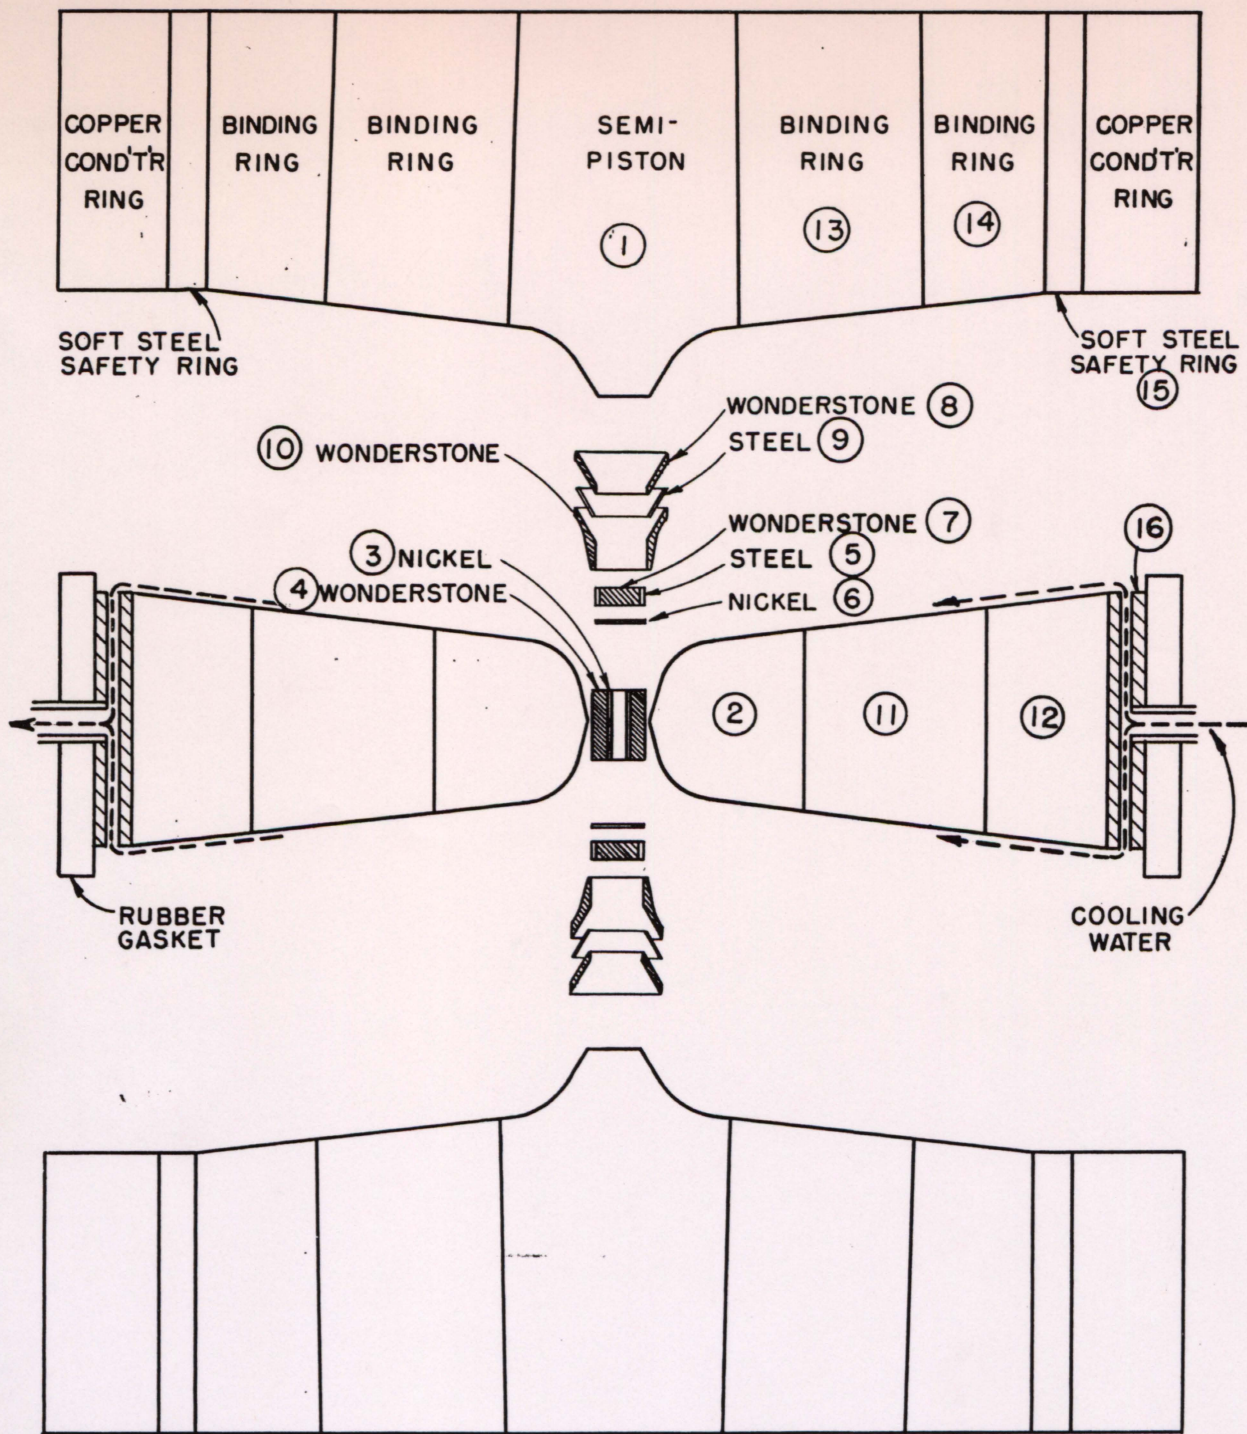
The "belt": high-temperature, high-pressure apparatus. "Exploded" assembly.
